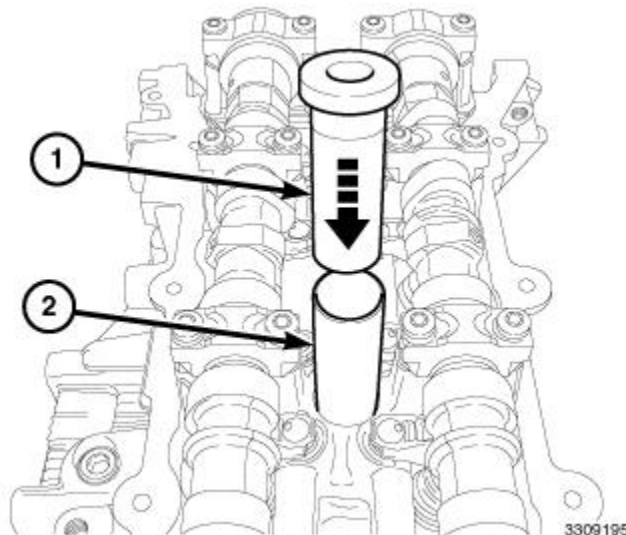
Spark Plug Tube Installer & Spark Plug Tube
